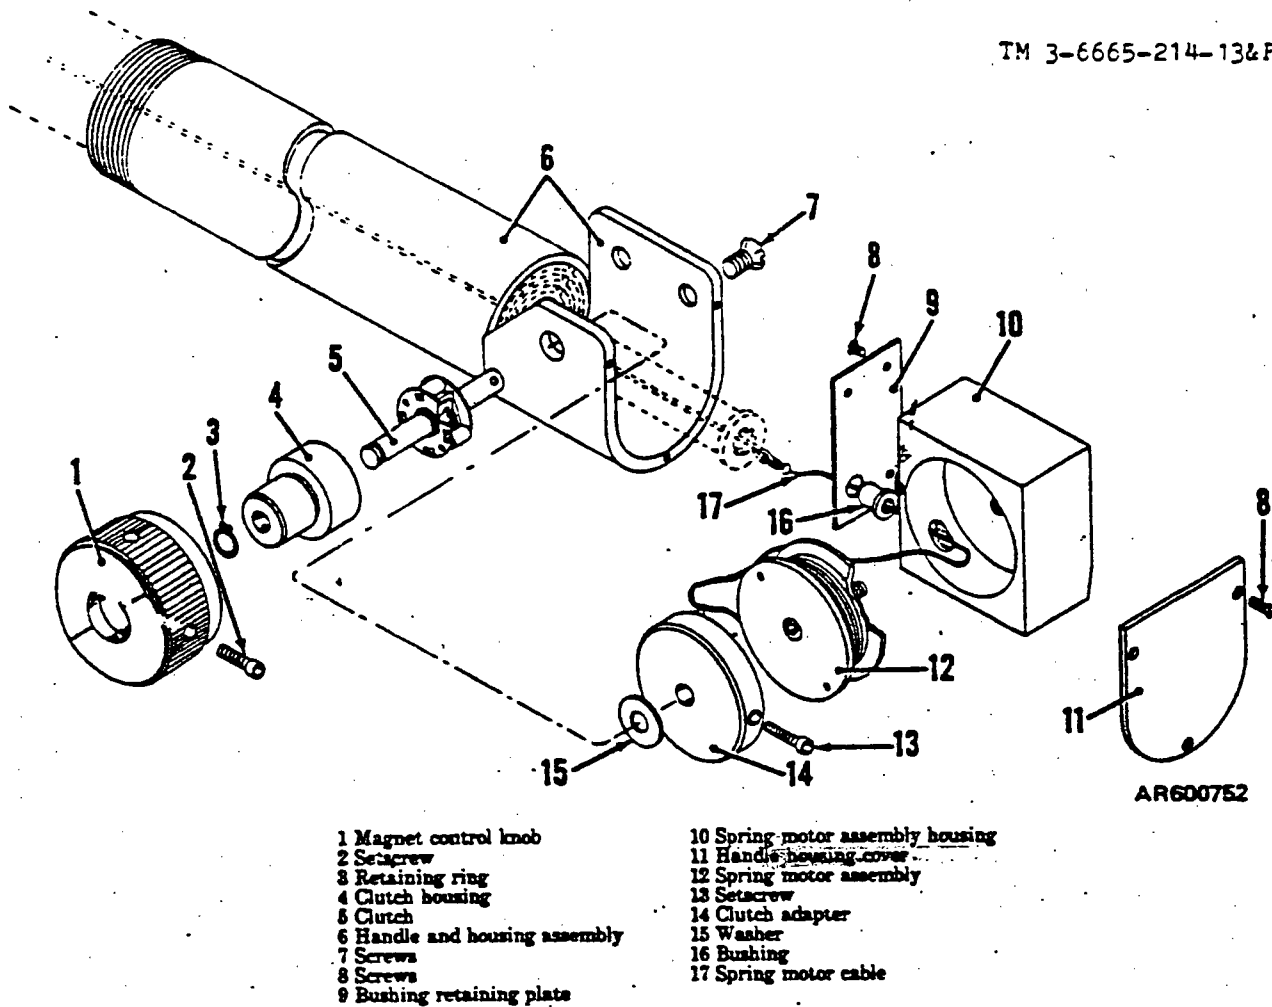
M4 radioactive source magnetic handler, motor and clutch assembly (exploded view).
